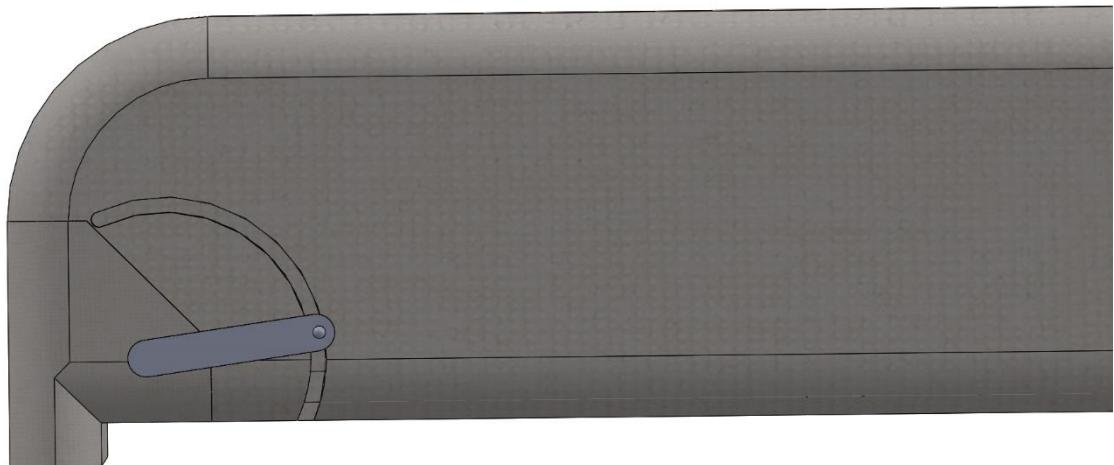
Cover and armrest locked with lock apparatus with right view
